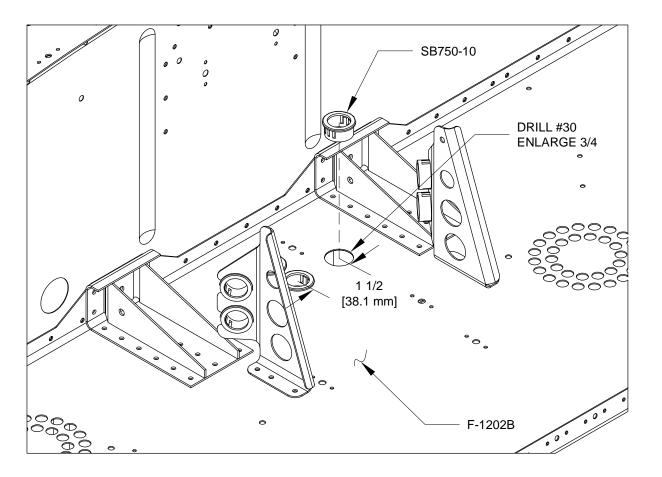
ADDING A WIRING HOLE TO THE PANEL BASE (SOME PARTS NOT SHOWN FOR CLARITY)
